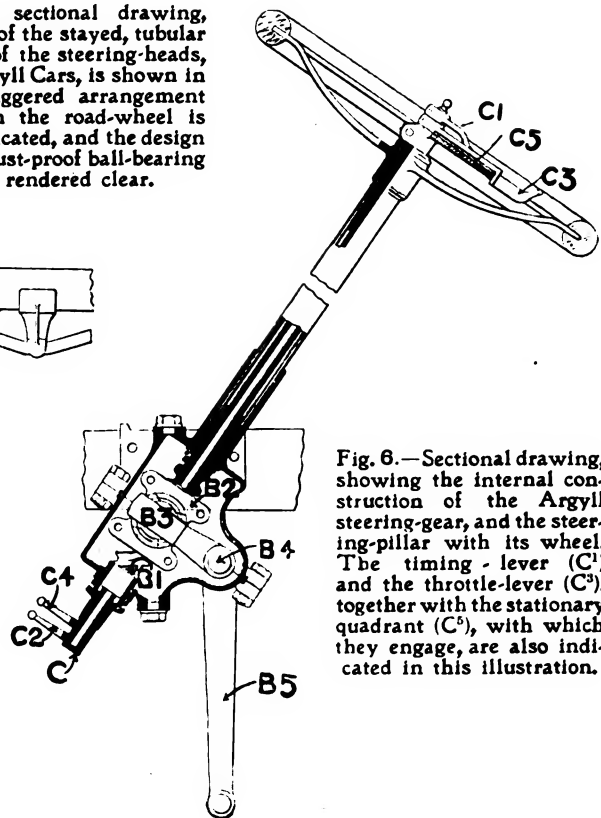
Sectional drawing, showing the internal construction of the Argyll steering-gear, and the steering-pillar with its wheel. The timing-lever (C¹) and the throttle-lever (C²), together with the stationary quadrant (C³), with which they engage, are also indicated in this illustration.
